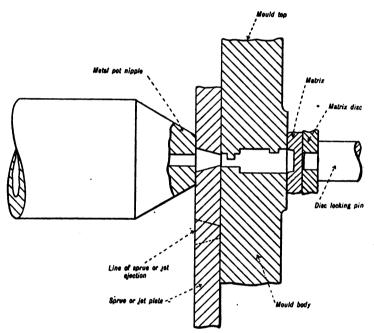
Oddur type-bar machine. Section at the casting-point. Scale: twice full size.
